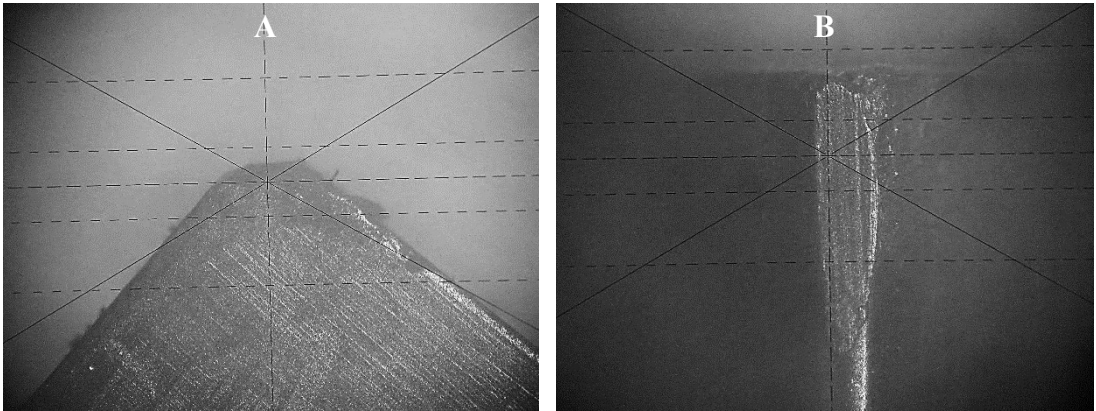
Wear of the rake (A) and the flank (B) faces on the cutting edge of an As15-6 plate after testing.
